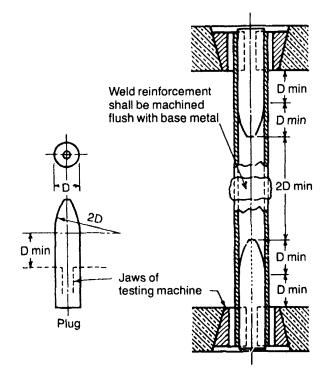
B — Tension — full section — small diameter pipe
